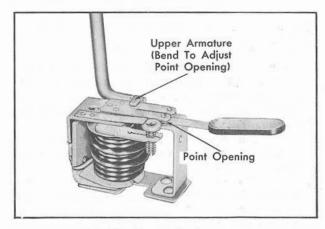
Checking and Adjusting Cut-Out Relay Point Opening
